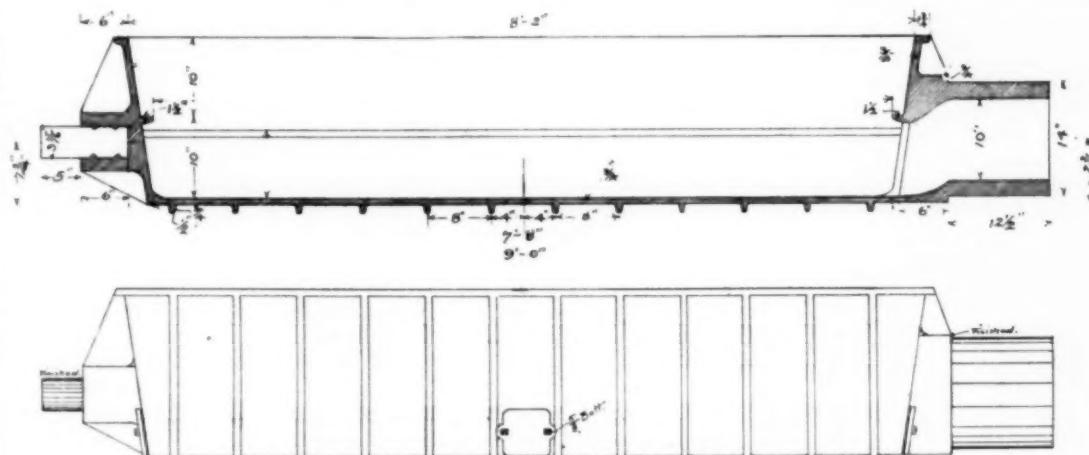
LONGITUDINAL SECTION AND SIDE VIEW OF GREENAWALT DOWN-DRAFT PAN.
